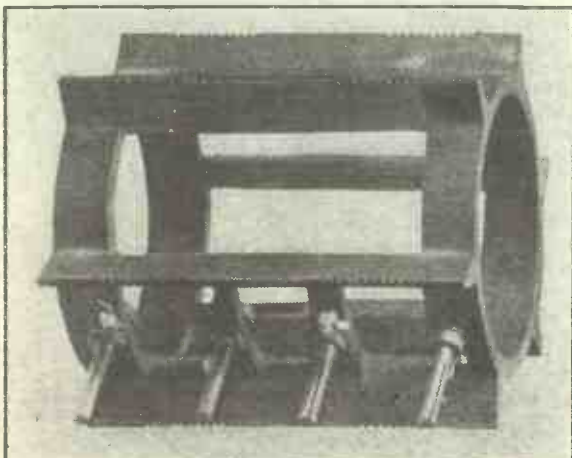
shows the way in which the cutting out is done. Holes are made with a ¼-in. or similar drill at the corners of the rectangles to be cut away, and the material is then removed roughly by means of a small keyhole saw. This having been done, a file is used to trim up the former. The amount of ebonite that can be removed in this way without unduly weakening the
